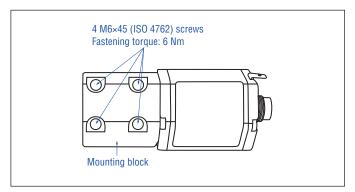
Mounting of RD4's sensor electronics housing (example of bottom cable entry)
